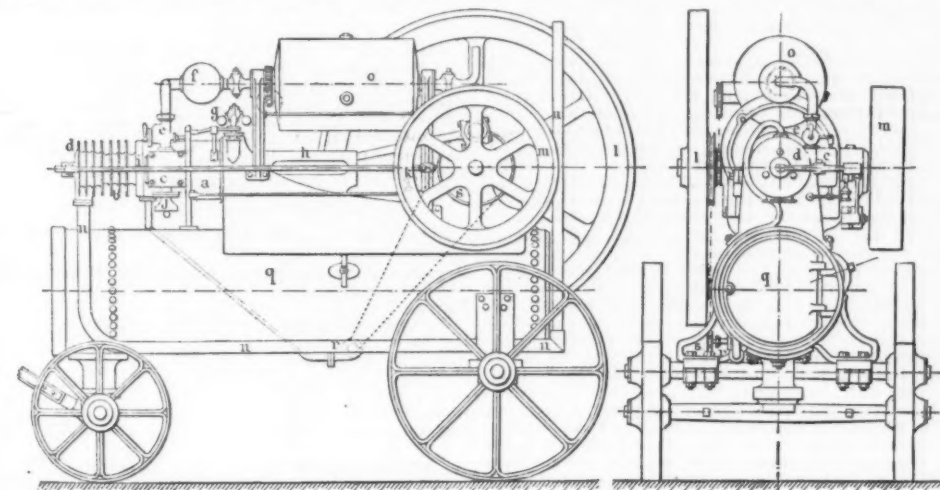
THE MOVABLE CARBURETED AIR MOTOR.
